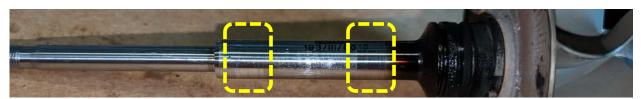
Turbo Shaft – journal wear areas highlighted in yellow.
